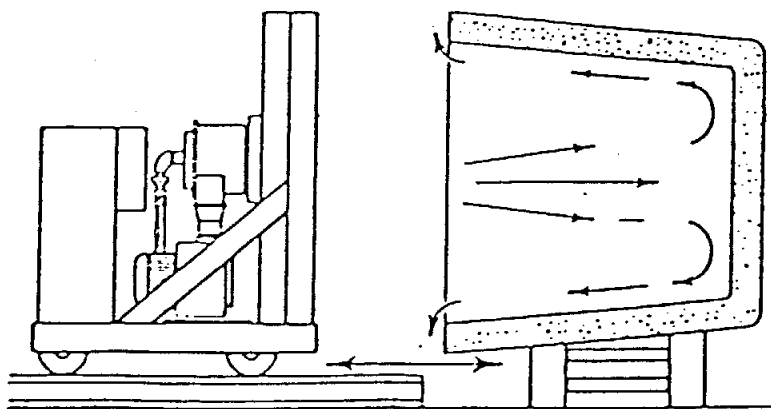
WALL TYPE LADLE HEATING STATION
